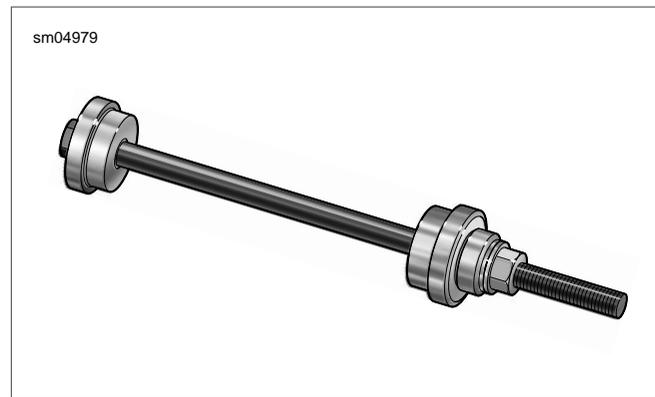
Steering Head Bearing Cup Installer (Part No. HD-39302)
